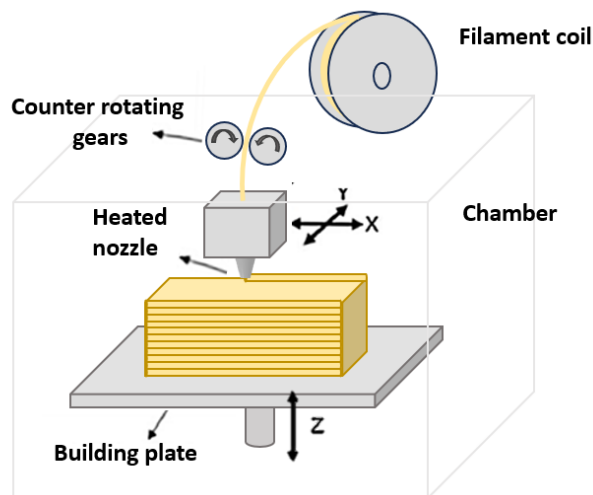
Scheme of Fused Filament Fabrication machine.
